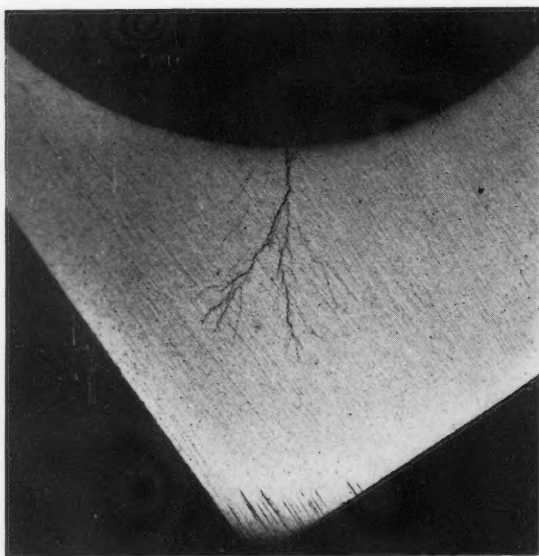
Case 2. Transverse section through a portion of the bottom tube sheet of the No. 2 AISI waste heat boiler showing the stress corrosion cracks. The branching nature of these cracks is clearly shown. Electrolytic oxalic etch, X100.
